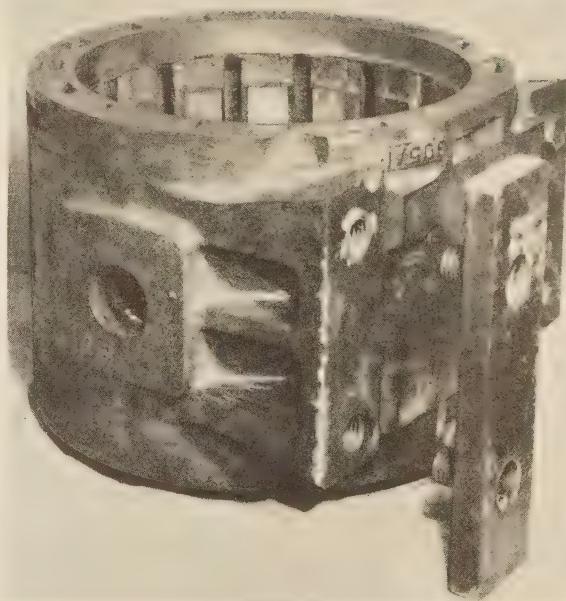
CAST-IRON FRAME WITH STEEL FEET WELDED TO STUDS THREADED INTO THE FRAME
